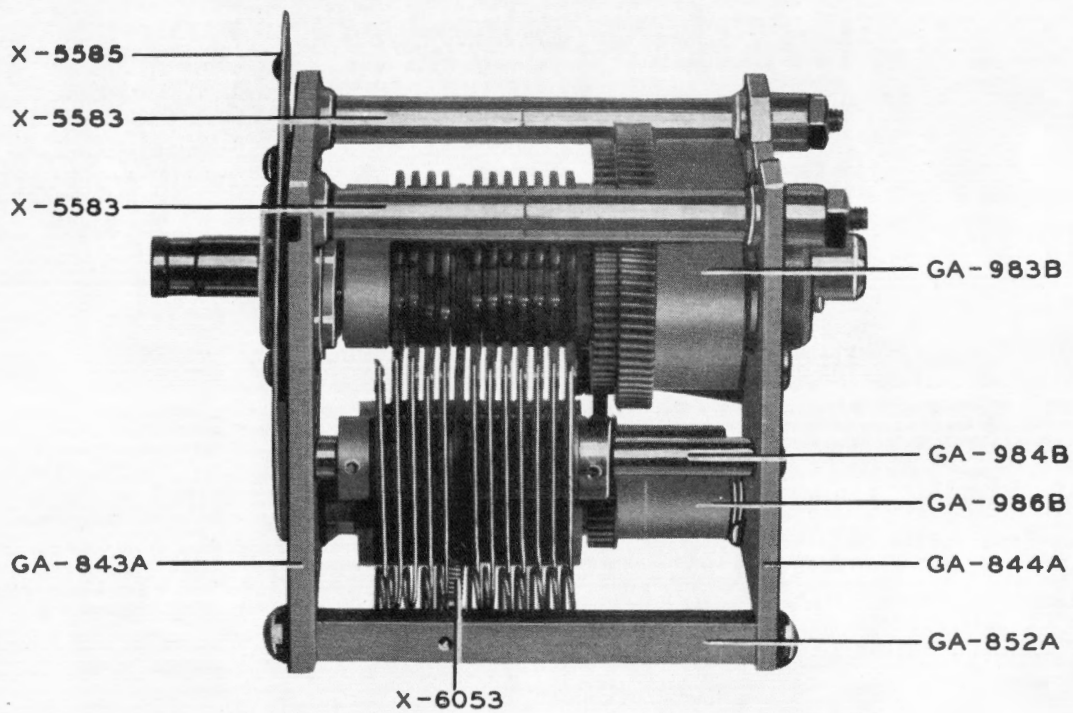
96J Autotune Singleturn Unit—Right Side View
